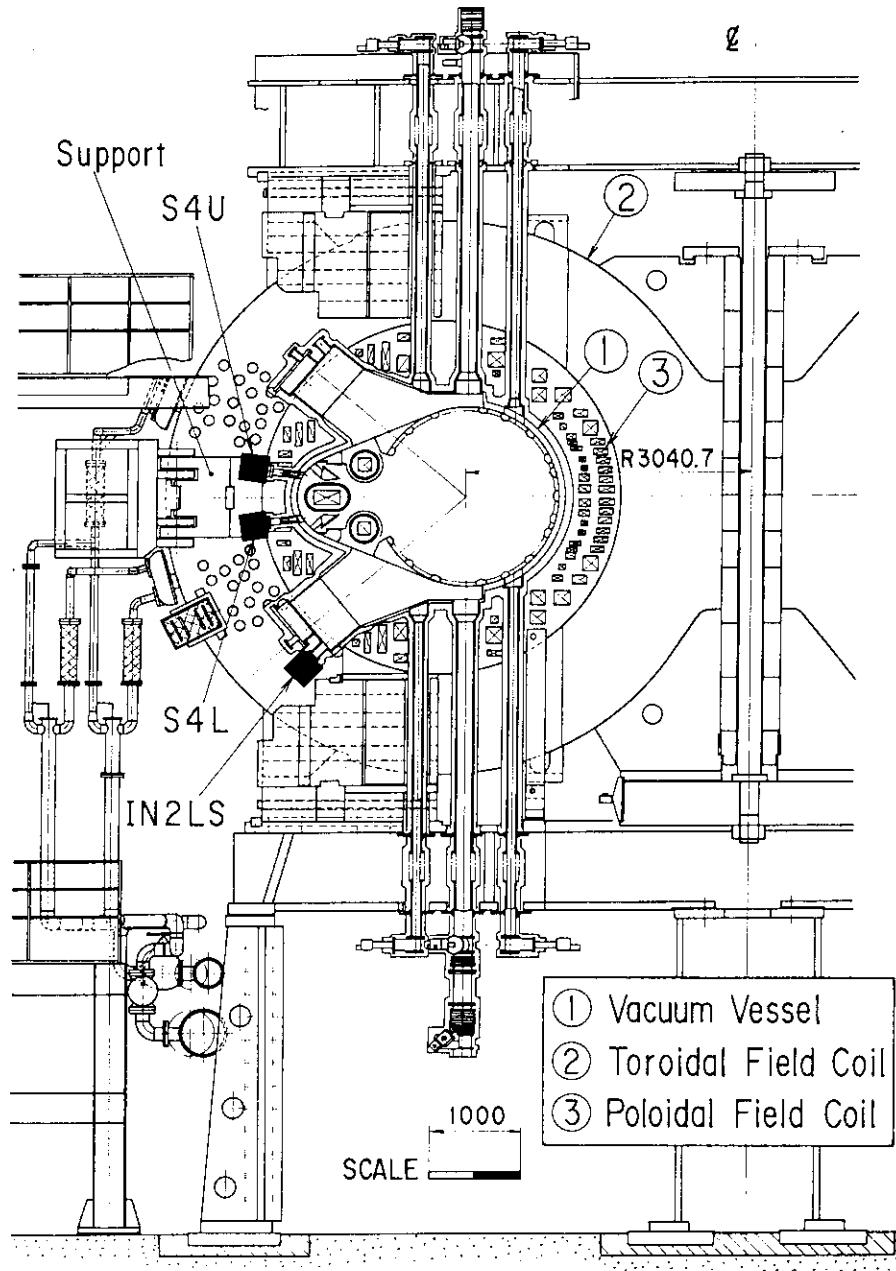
Cross sectional view of JT-60. The gauge heads are fixed to the flanges of S4U, S4L, and IN2LS ports.
